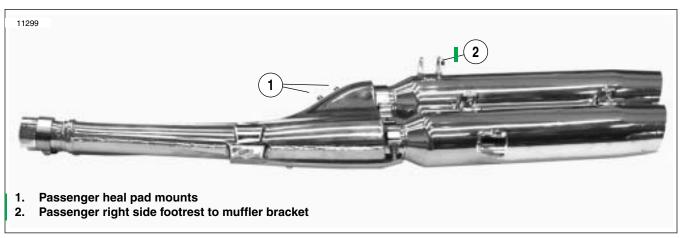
Exhaust System Rear View (exhaust system removed shown with heat shields removed for clarity)
